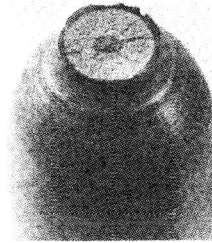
Bimodal fracture surface of Bridgman-type specimen; dimple fracture mode in the central and cleavage fracture mode in the outer zone.
